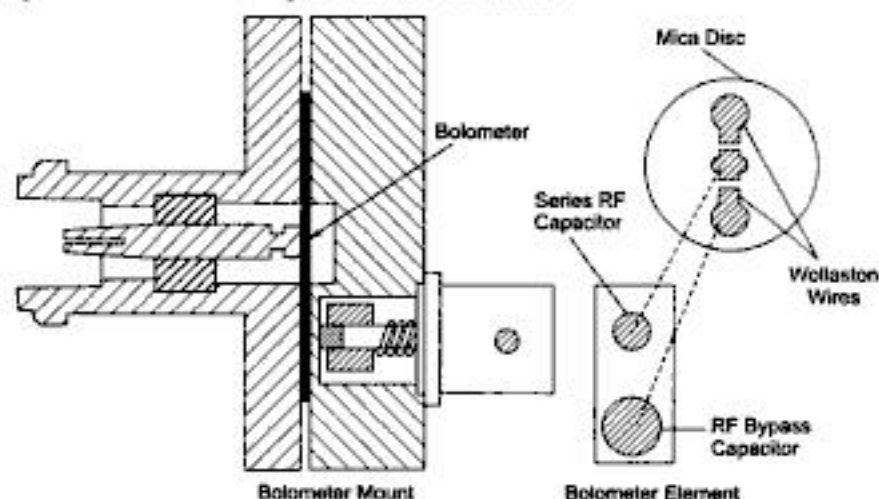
■ Schematic View of Bolometer Mount and Bolometer Element
